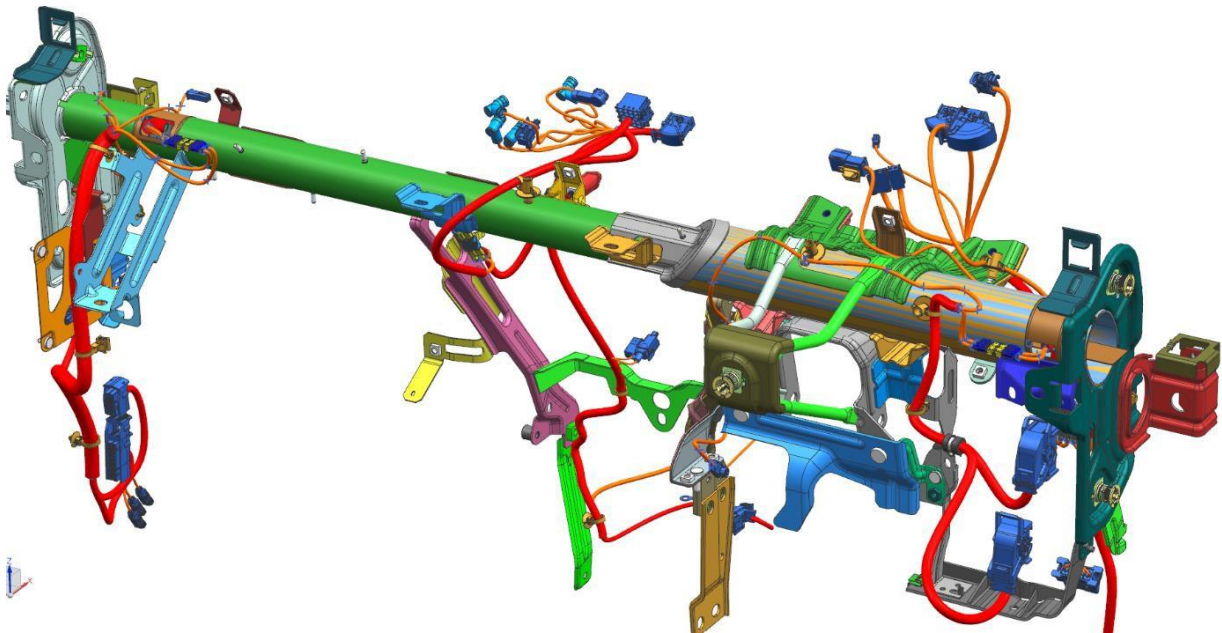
Cross-Car Beam proposed model sheet metal attached back isometric-view
